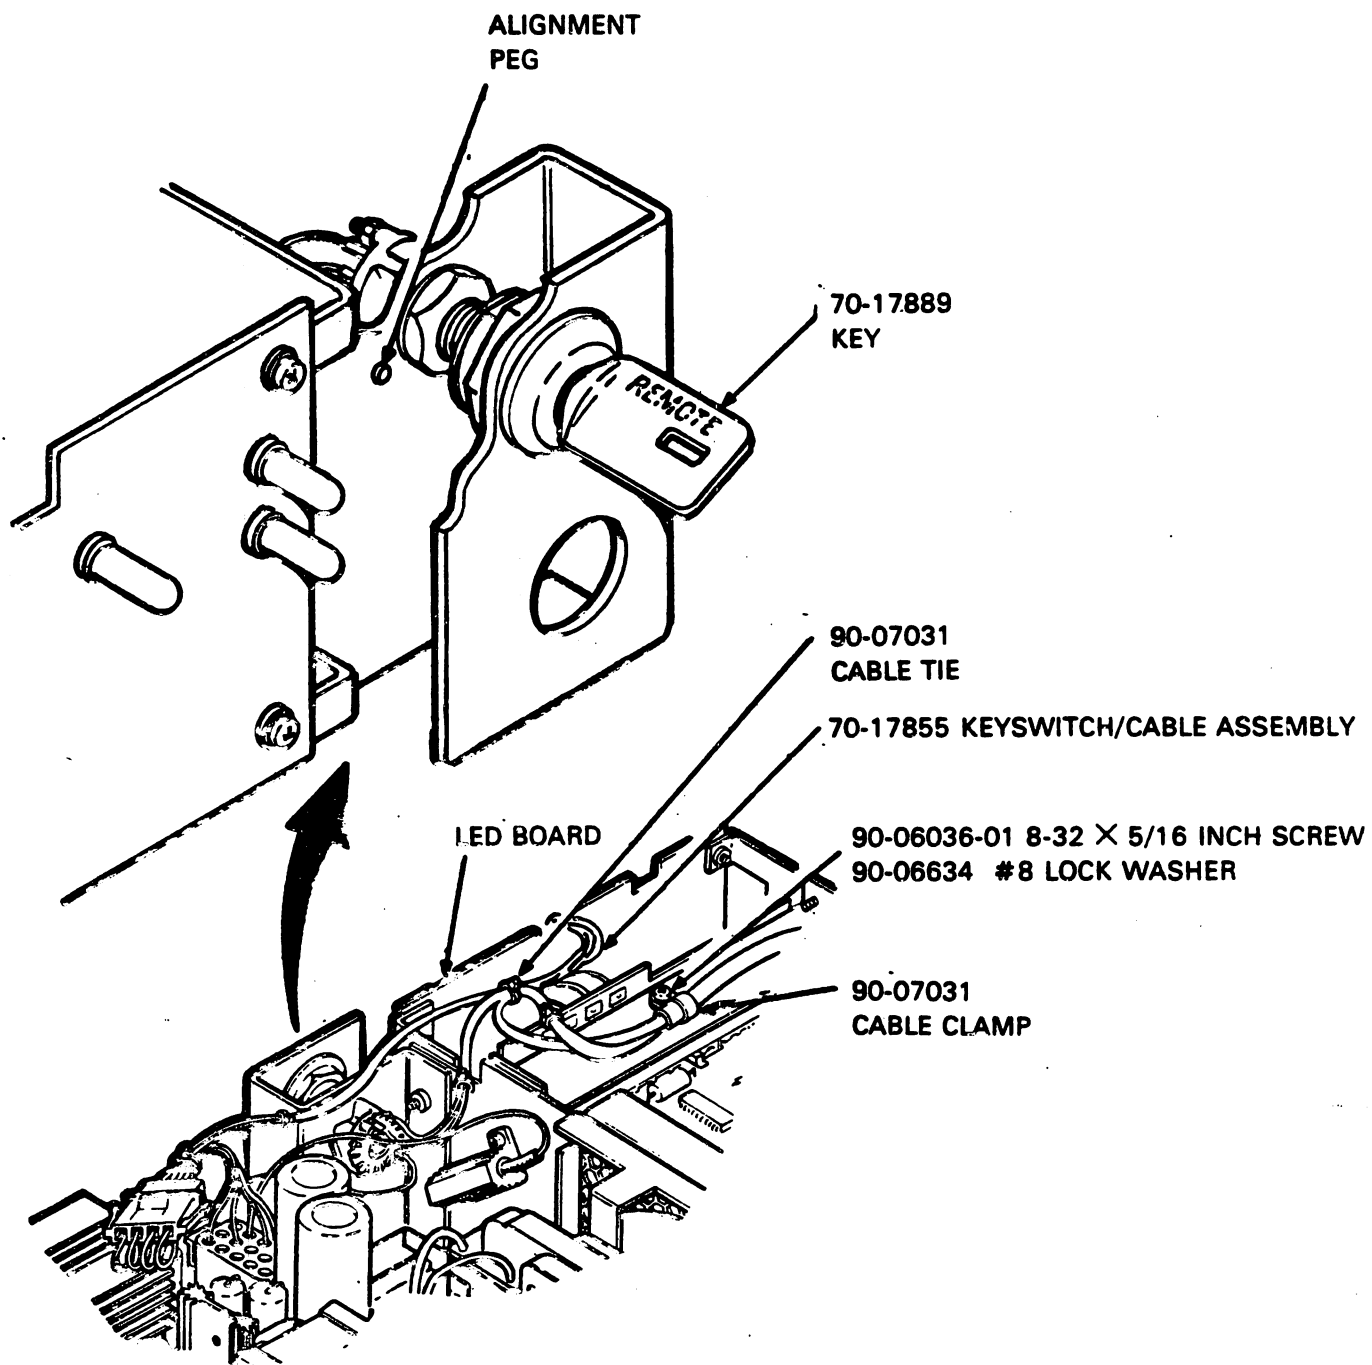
Keyswitch/Cable and Lock Assembly
